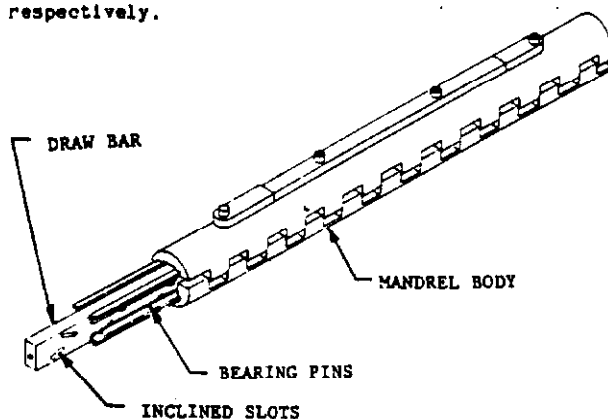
Illustration of expanded mandrel with end cut away to show mechanism.
